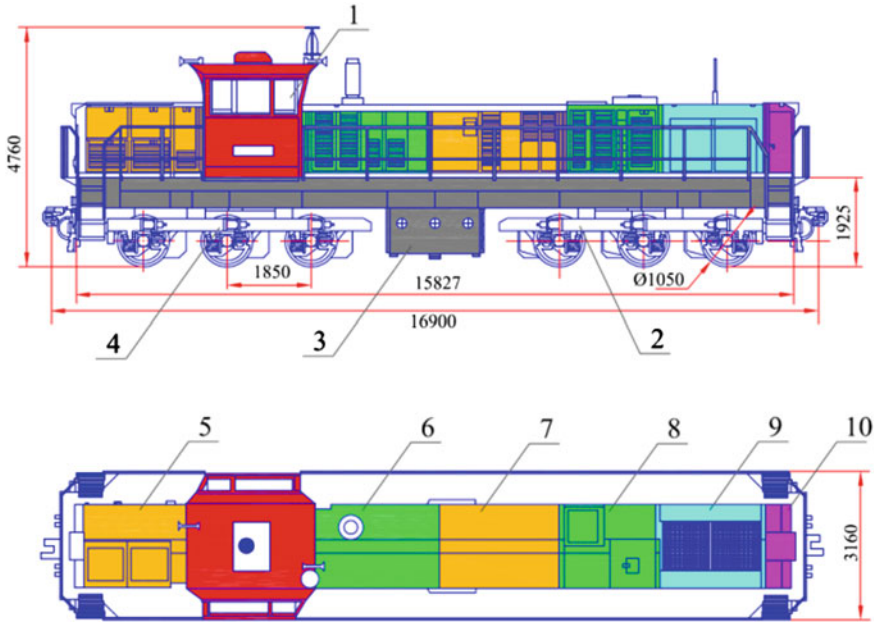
Arrangement of TEM TMH diesel-electric locomotive assemblies: 1—cabin; 2, 4— bogies; 3—fuel tank; 5—electric power equipment (contactors, etc.); 6—exciter connected by a shaft to the AC traction generator; 7—diesel engine; 8—electric equipment; 9—cooling sections; 10—air equipment
